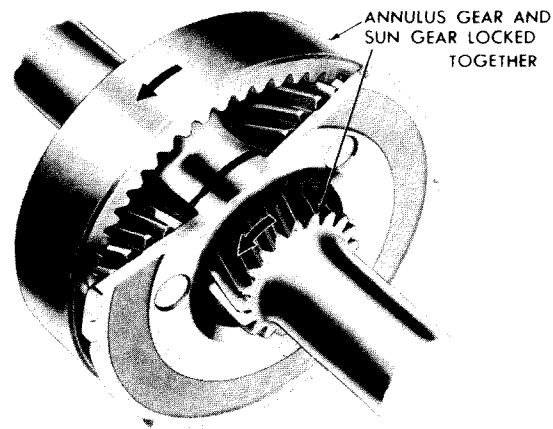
Planetary Gear Set—Direct (Annulus and Sun Gear Locked)
